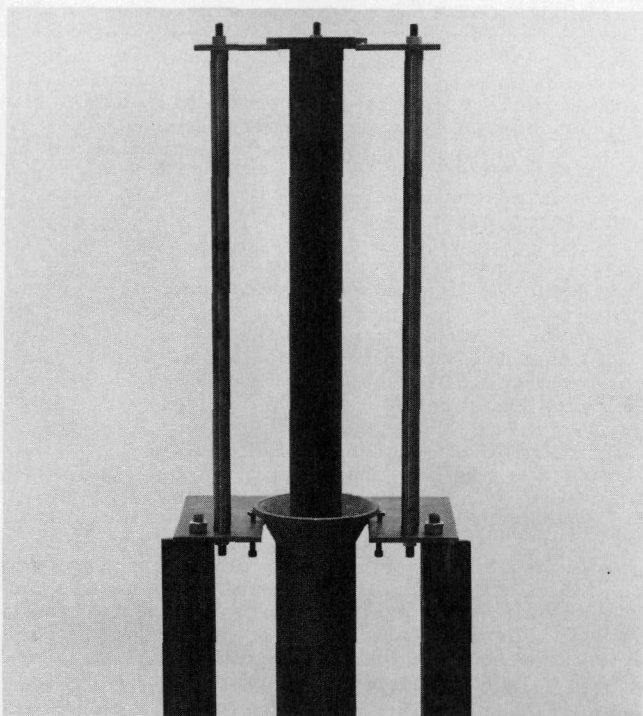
Relative Position of the Inner Tube and the Outer Tube Held In Place By Tube Alignment Fixture
